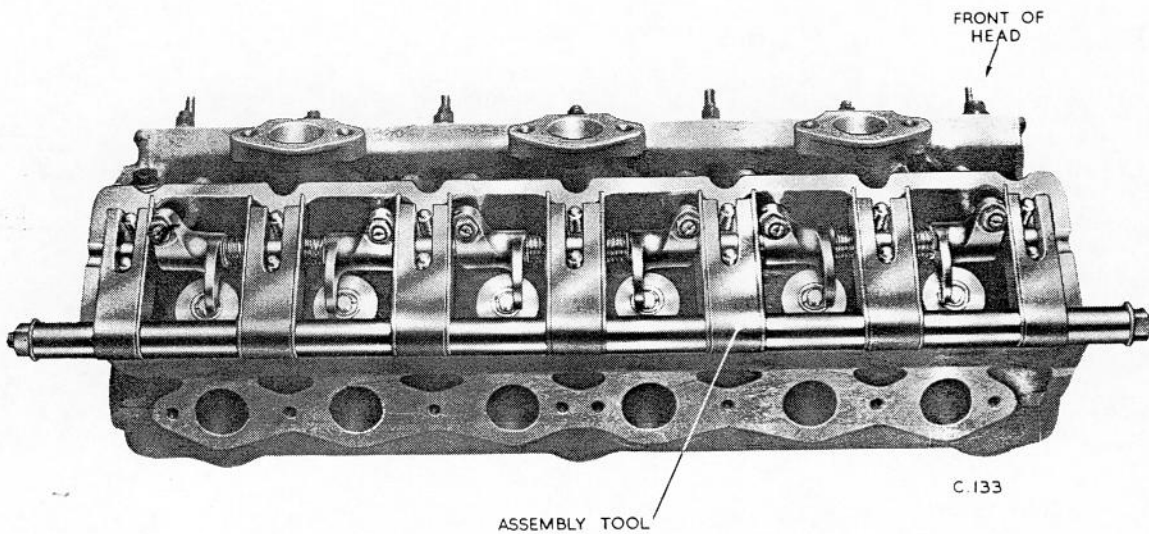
Exhaust rocker spindle assembly fitted to head.
